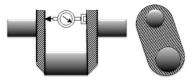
Crankshaft deflection on position bottom dead centre (Source: https://mirmarine.net/stati-naanglijskom/marine-engine/372-crankshaft)
